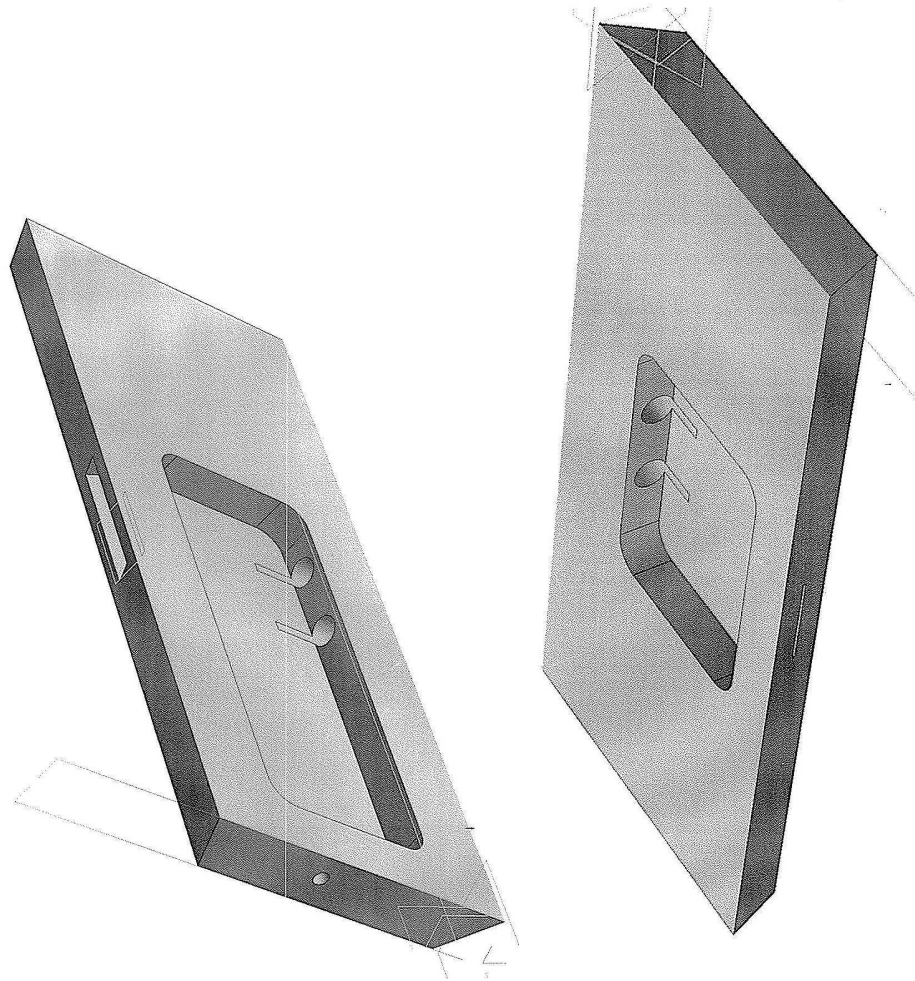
Bottom and top plate modular pieces. The design plan on the left is a different view of the previous bottom plate pieces. The recesses for the coil loop ends are shown within a larger milled out area. The circuit boards are housed in the bottom modular pieces.
